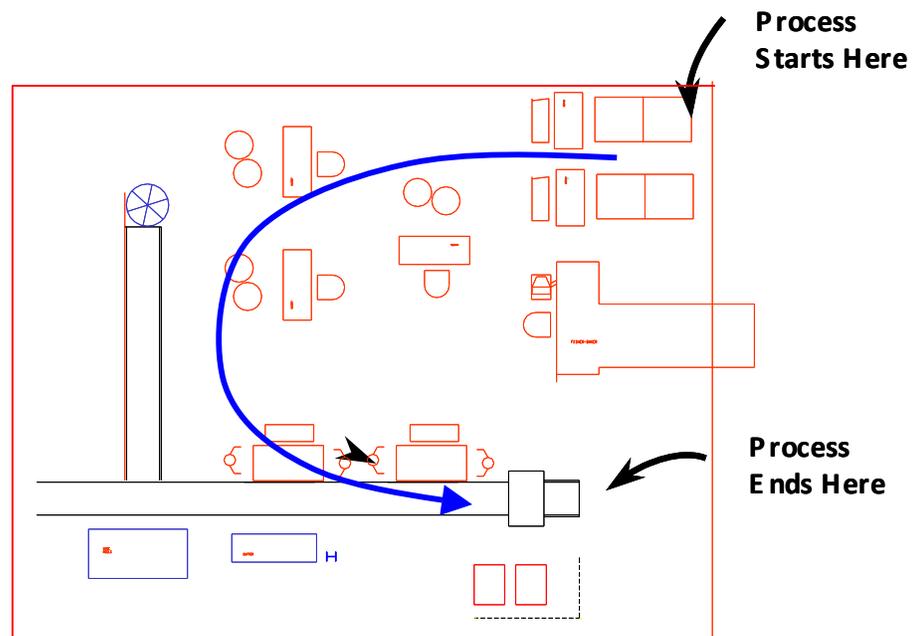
Transformer Winding and Assembly Layout After Kaizen Improvement
